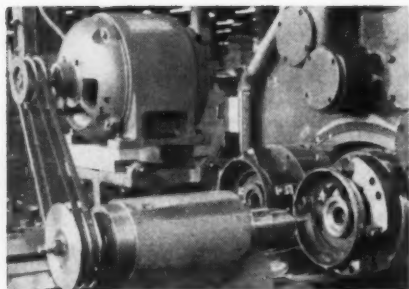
Special attachment of a precision boring spindle, motor driven, mounted on the end-working slide for precision boring the shaft hole of a motor end frame.
